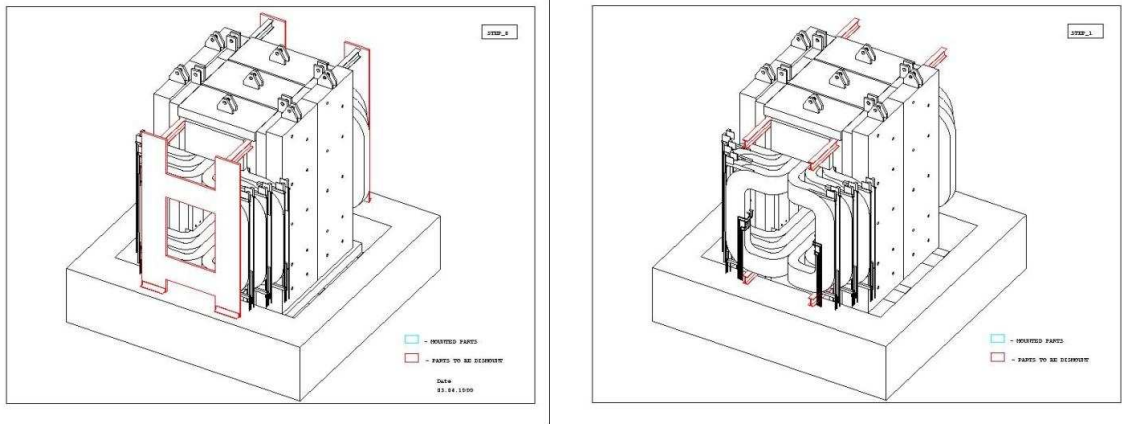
SM3 Analysis Magnet Assembly Steps 1 (left) and 2 (right)
